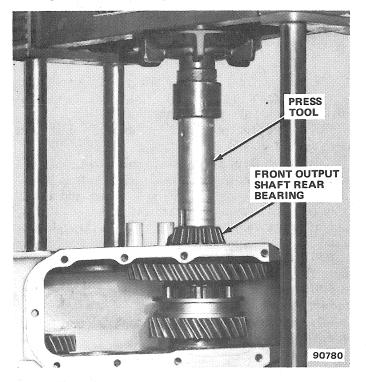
D-82 Front Output Shaft Rear Bearing Installation
